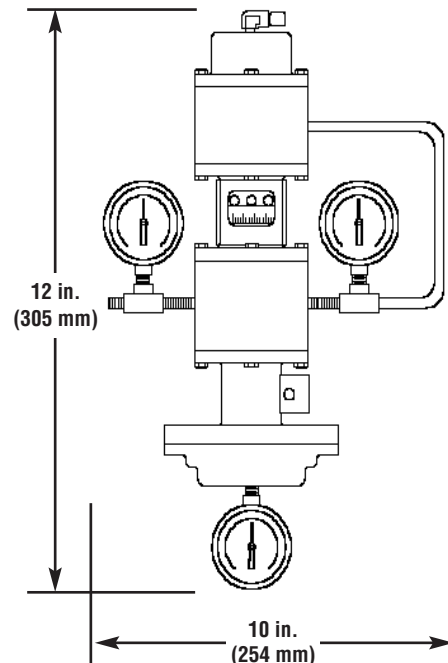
Overall dimensions of Becker Model HPP-SB Pneumatic Positioner (Standard Range)
